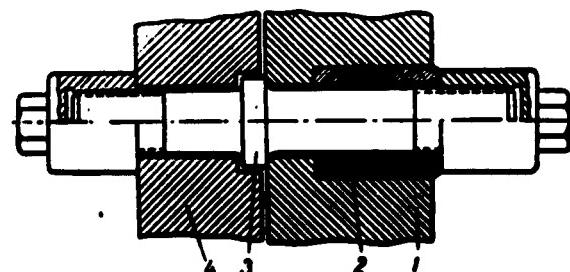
Construction of flange coupling of austenitic valve chest and pearlitic outer cylinder. 1) flange of outer cylinder; 2) austenitic sleeve pipe; 3) austenitic stud bolt; 4) flange of steam chest.
